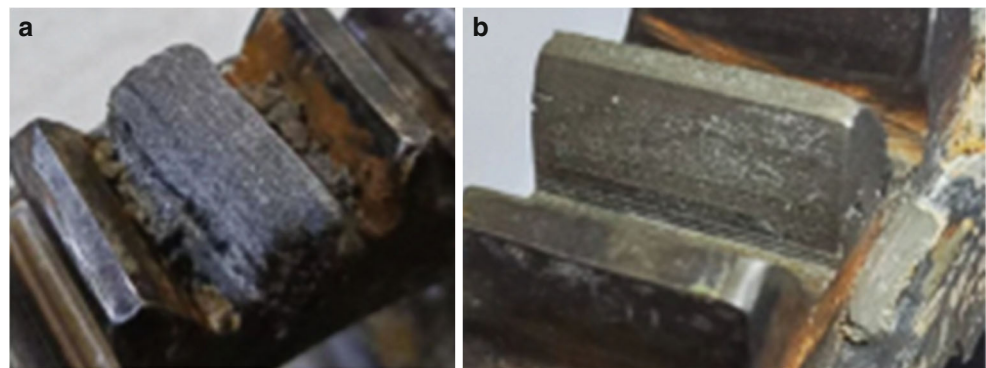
20 CrMnTi gear repair using Ni60: (a) Direct Laser Deposition of Ni60 and (b) tooth shape restoration using a mill process. Adapted from [12]
